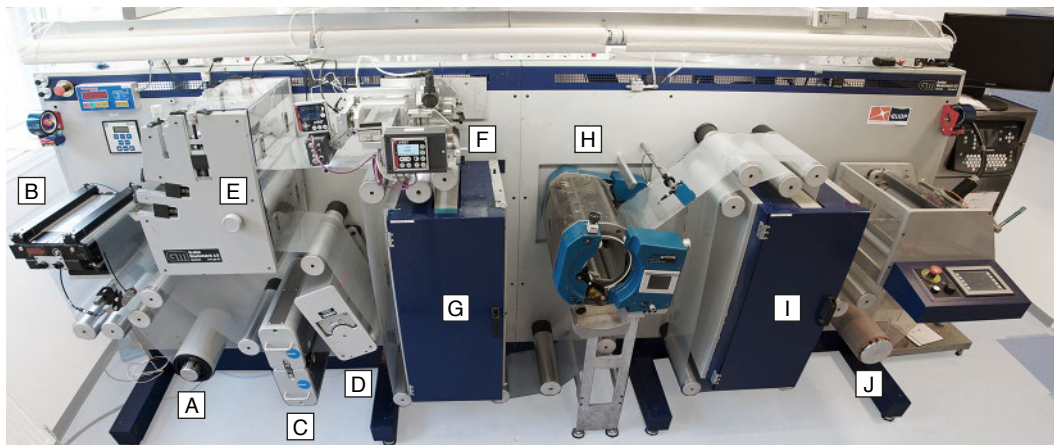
Photograph of a R2R coating and printing setup employed for the large-scale fabrication of OPV cells and modules. The main components in direction of web movement: (A) unwinder, (B) edge guide, (C) web cleaner, (D) corona treatment, (E) flexo printing, (F) slot-die coating, (G) dryer, (H) rotary screen printing, (I) dryer, (J) rewinder. Adapted from Ref. [61] with permission from Woodhead Publishing Limited.
